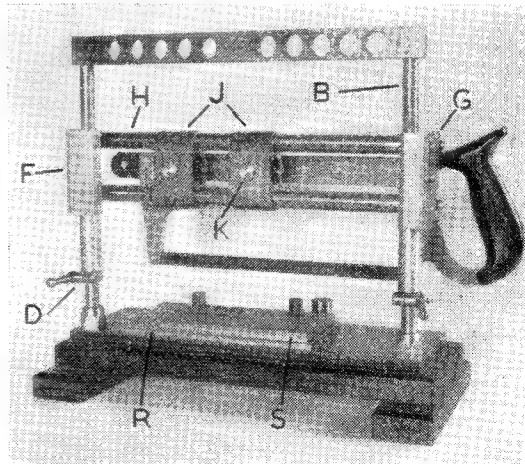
D—the adjustable stops; F—the slide blocks; G—the slidebar plates; H—the slidebars; J—the crosshead-bolts; K—the crossheads; R—the vice soleplate; S—the slide-plate
